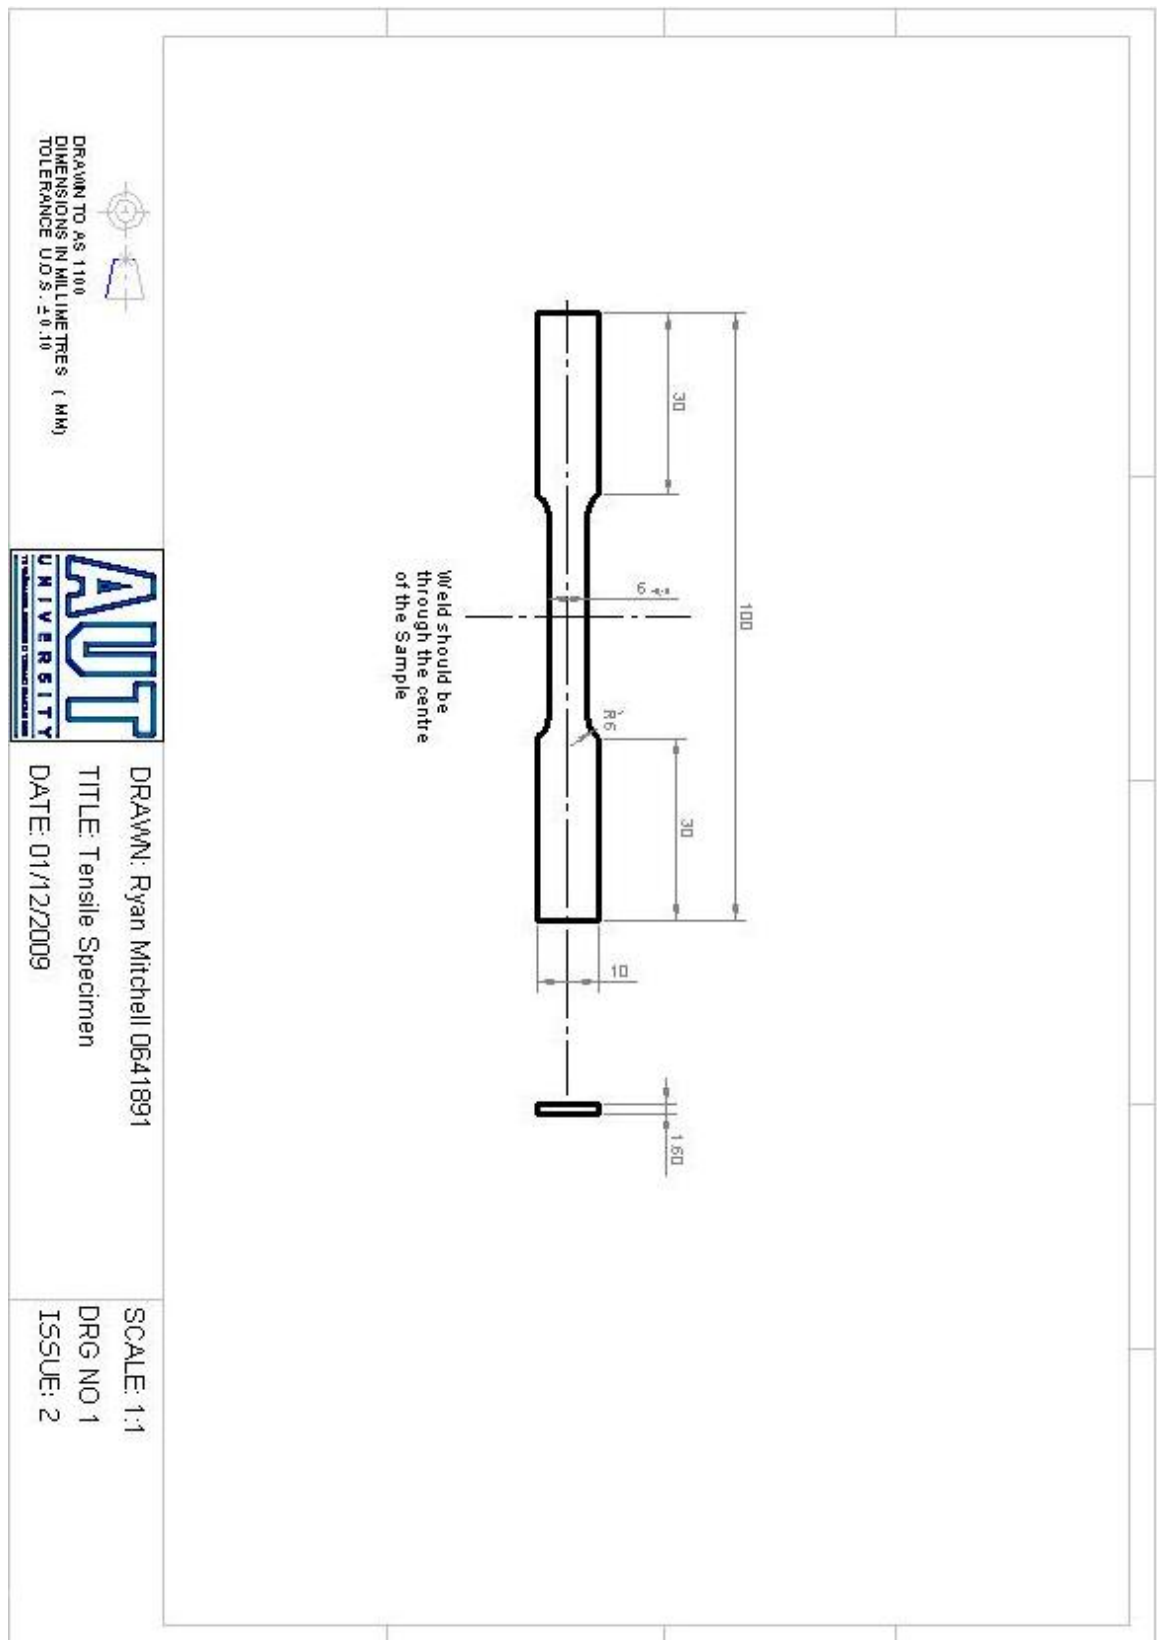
Solidworks drawing for undersized tensile samples [63].
